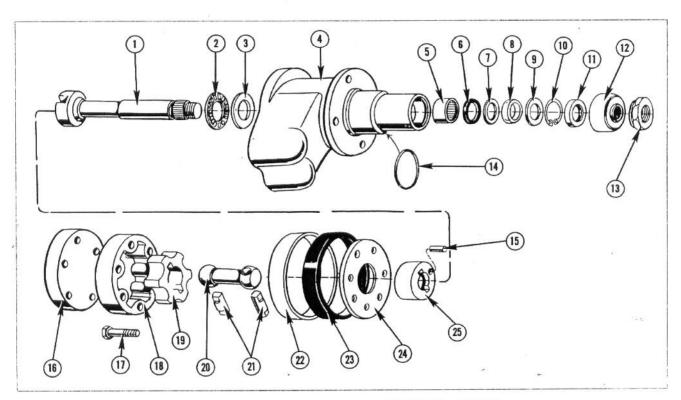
EXPLODED VIEW OF HYDROSTATIC HAND PUMP
